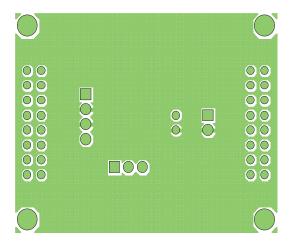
AAT4601 Evaluation Board Solder Side Layout.
